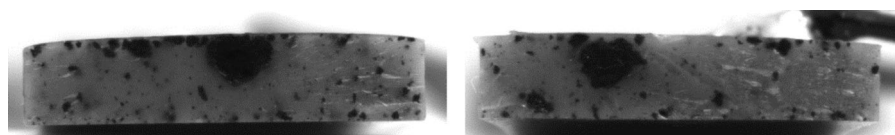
Fracture surfaces of ETiB specimen N. 6 and thermally aged ETiB specimen N. A1.
